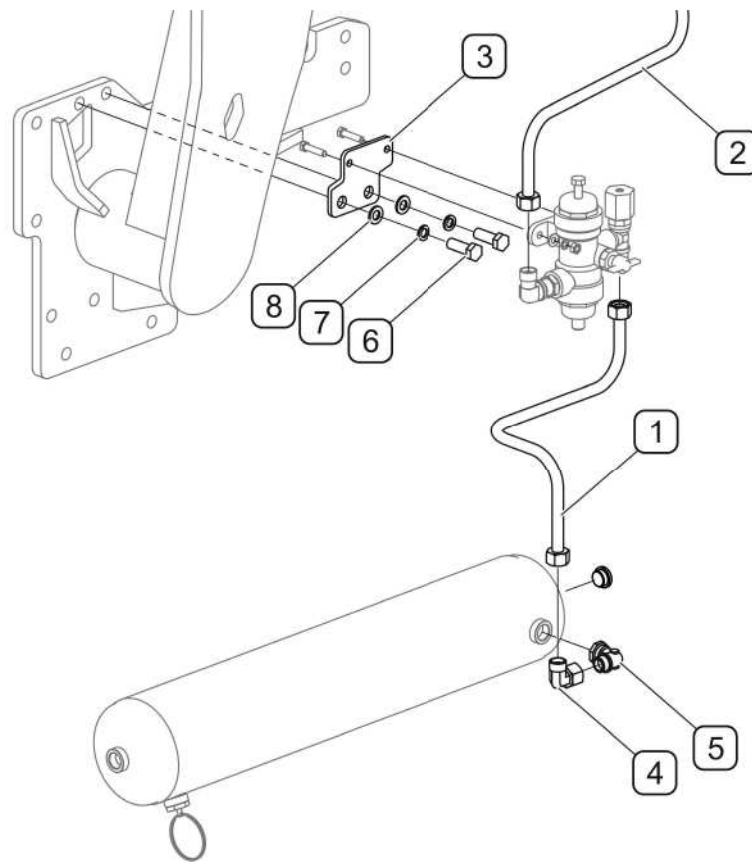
A Modification of pneumatic system in KIOTI DK451C tractors
